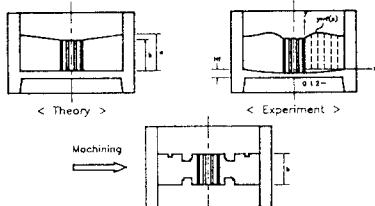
Schematic dimensions of initial billet, preform and final extruded product
